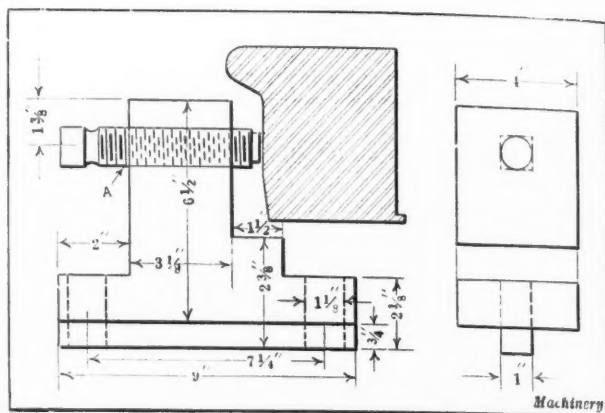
Locating Block Used in Centering Tire on Boring Mill Table
